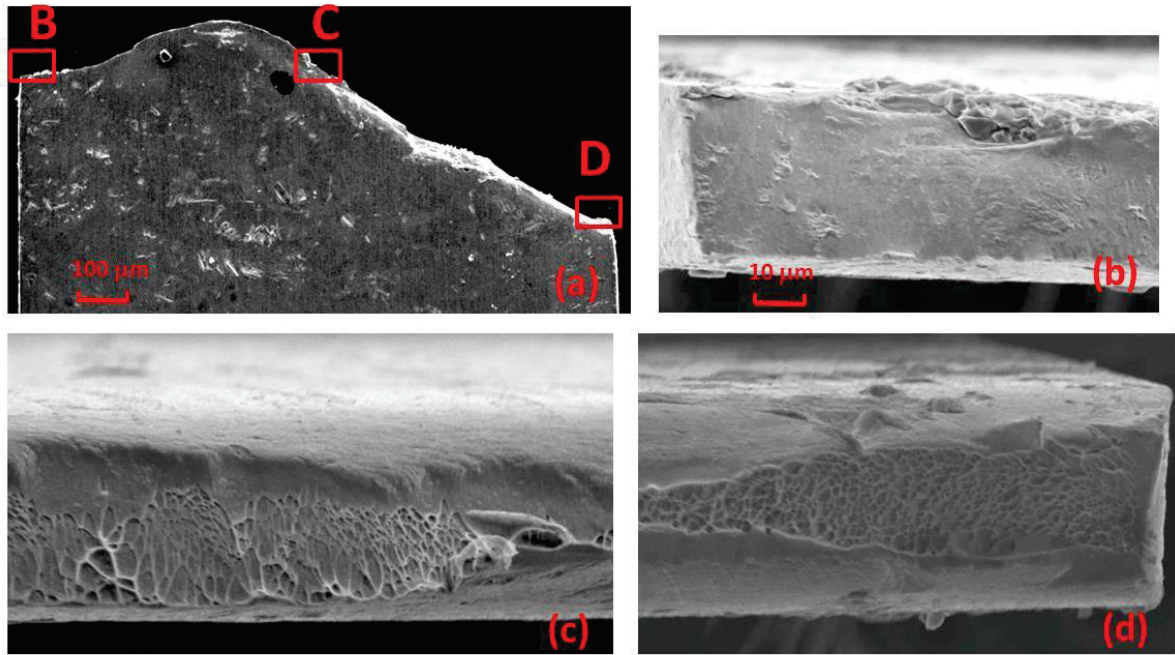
Fracture surface of tensile test on specimen thickness of 50 μm ; (a) longitudinal crack path, (b,c,d) zoom view at the same magnification of rectangular A,B,C respectively.
